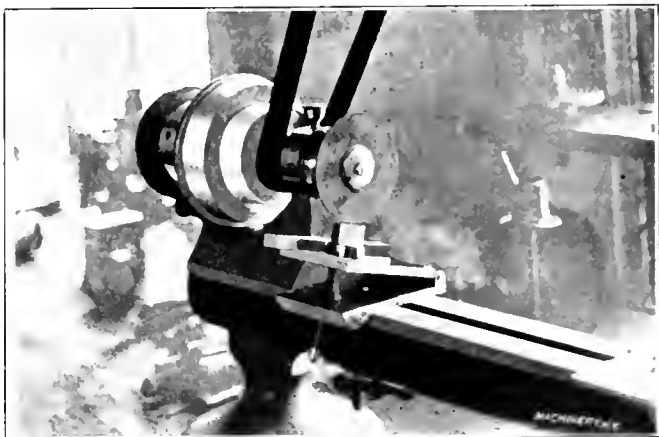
Adjustable Plate for Surface Grinding on the Bench Lathe
